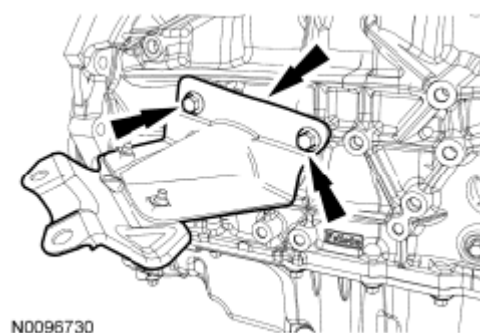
Locating Bolts & Exhaust Flexible Pipe Bracket
